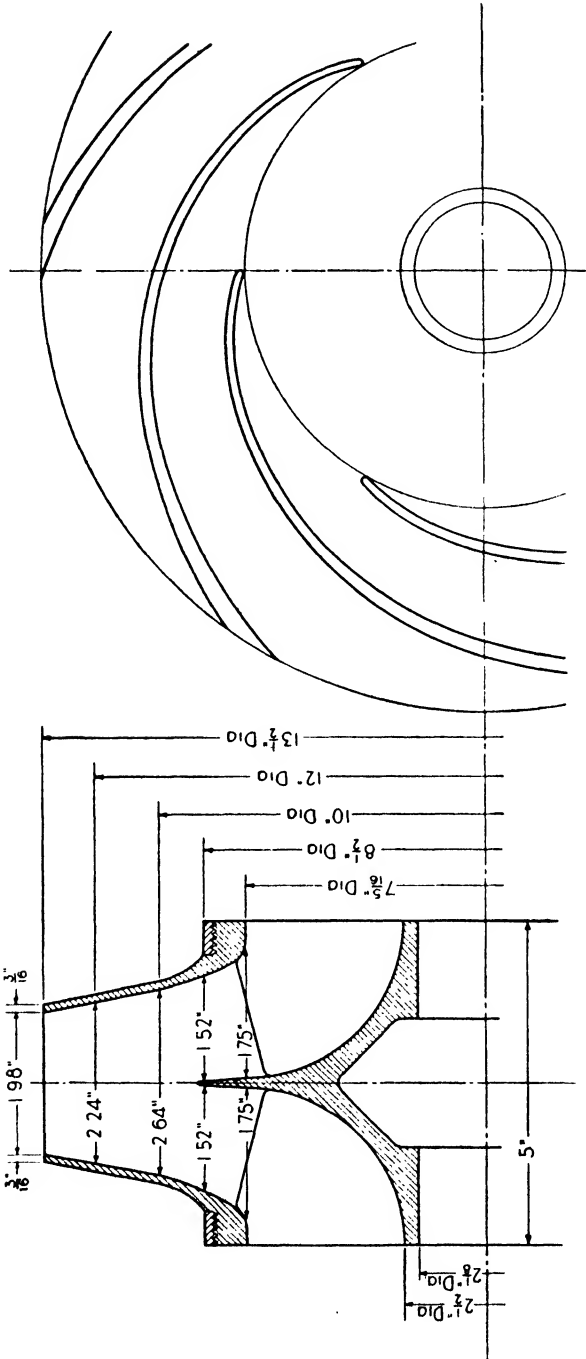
Sketch of impeller designed in Section 6-9.
